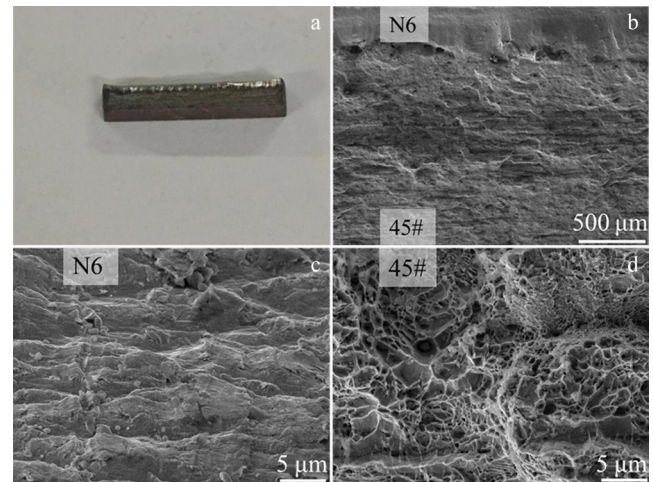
Tensile fracture morphologies: (a) macroscopic morphology, (b) combined interface, (c) N6 side, and (d) steel 45# side
